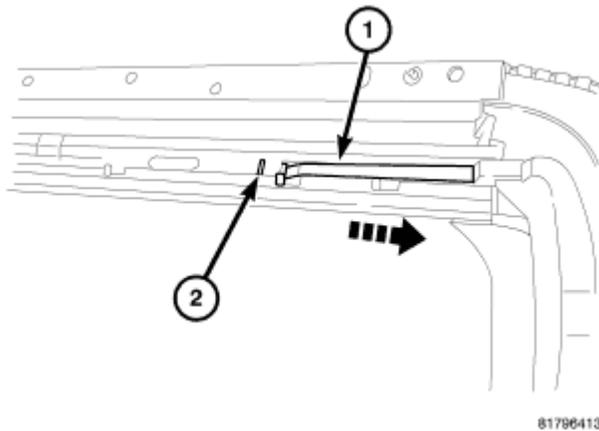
Sliding Wind Deflector And Spring Forward Under Car Top Lip And Making Sure Spring Lock Snaps Into Place
